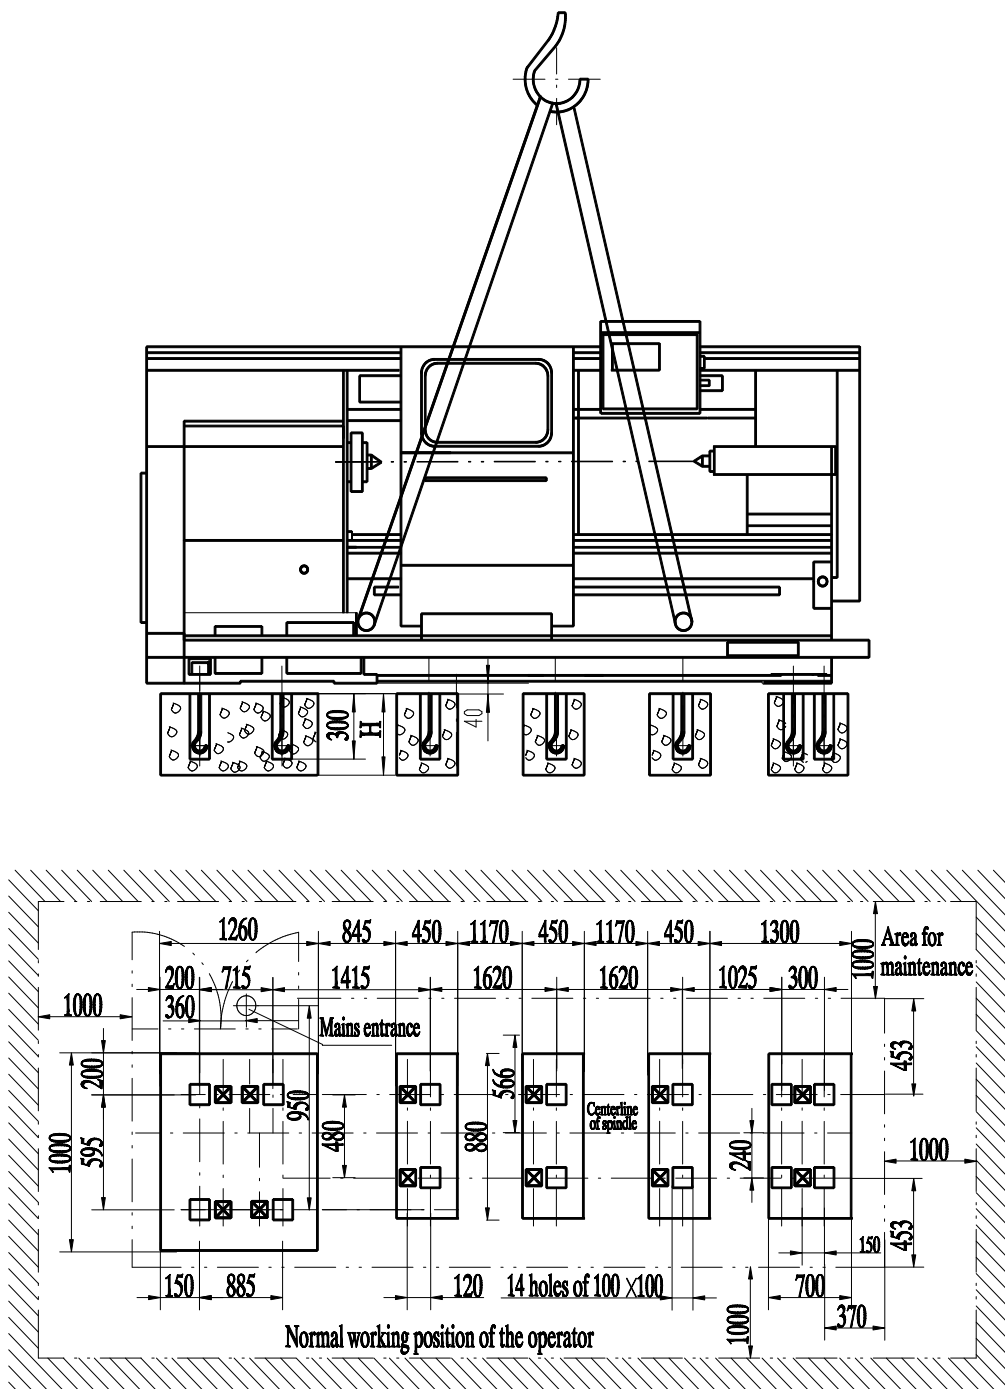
Foundation plan and handling schematic for the machine of 3000
